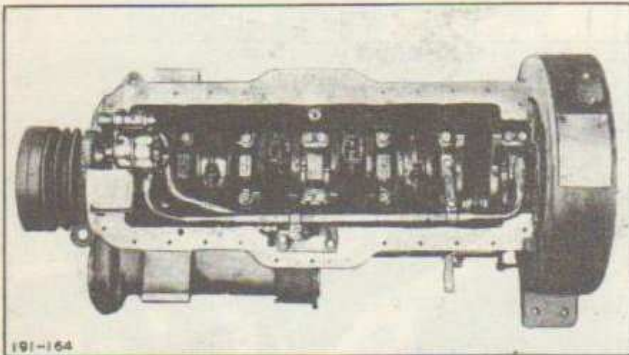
View into Upper Crankcase When Ready to Re-install Lower Crankcase
